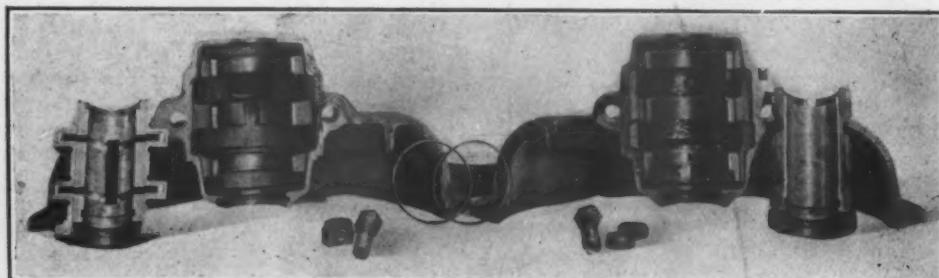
Parts of a Bearing Bracket Unassembled.
